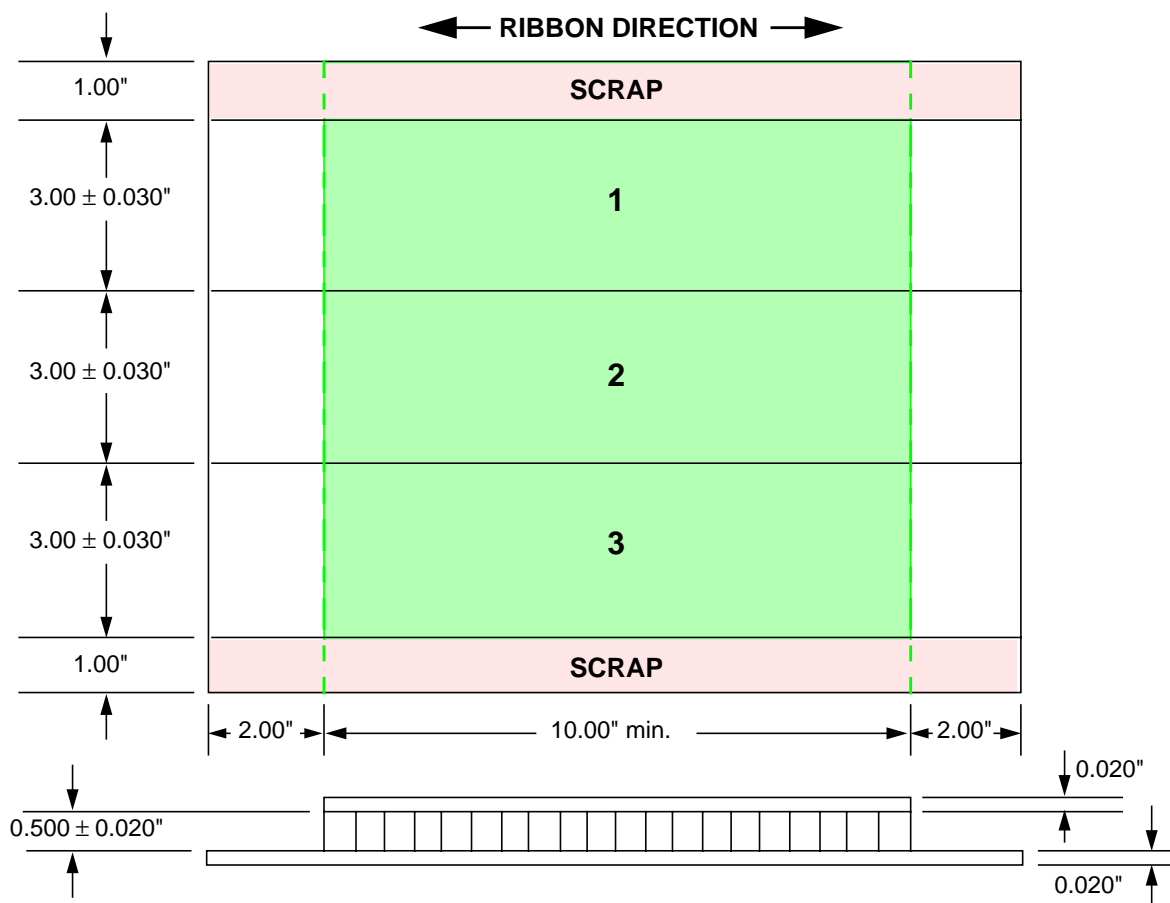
CLIMBING DRUM PEEL TEST PANEL (METAL TO METAL HONEYCOMB BONDS)
